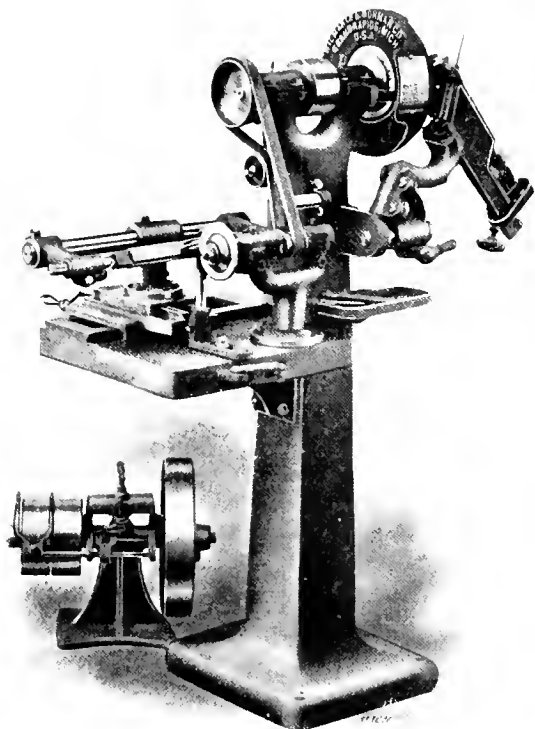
The Yankee Drill Grinder provided with a Cutter and Reamer Grinding Attachment.
